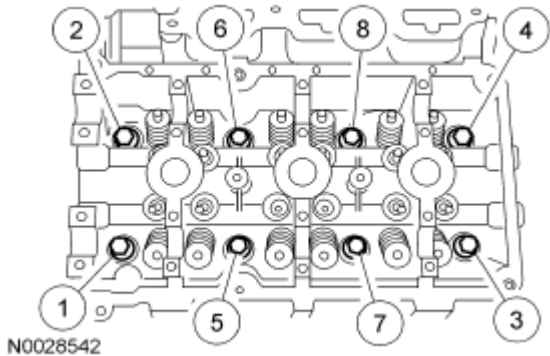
Identifying Loosening Sequence Of LH & RH Cylinder Bolts
